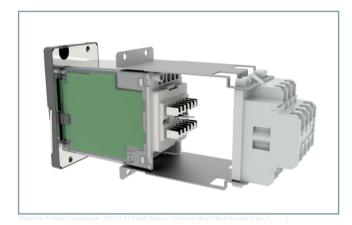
/91 Panel Mount with Adapter Unit with Rear Connection
